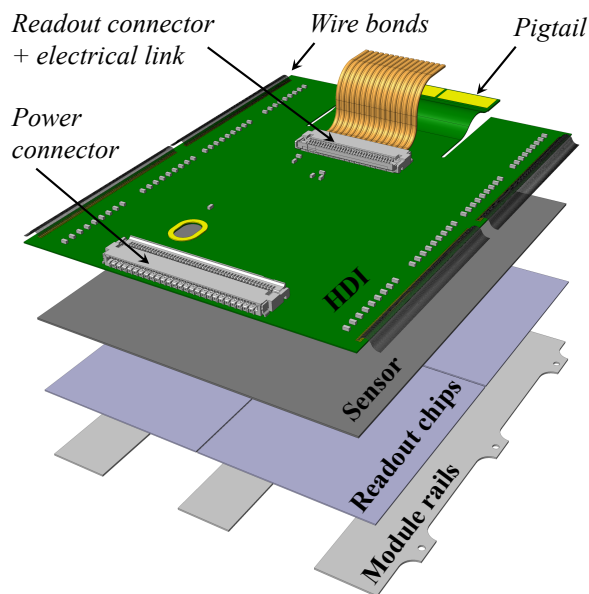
3D exploded view of a CMS Phase-2 Inner Tracker hybrid pixel module.
